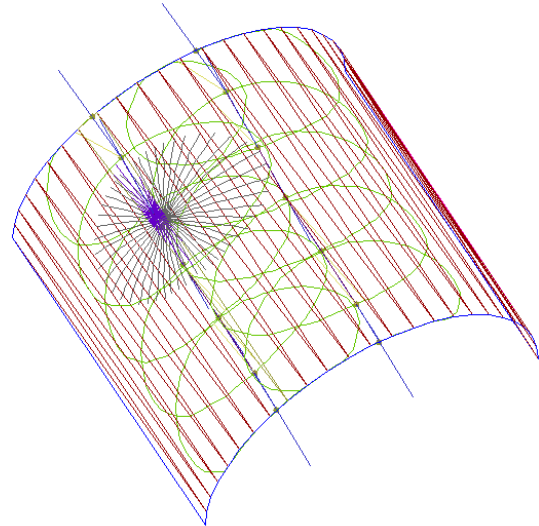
Tool paths on the same cylindrical surface machined from the concave side
